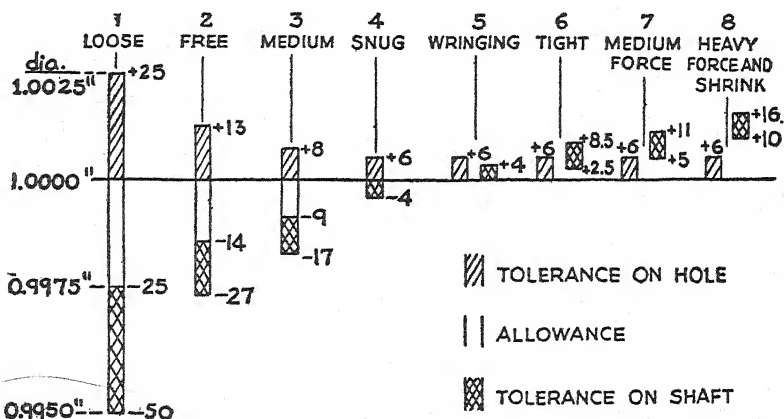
The Eight A.S.A. Fits for Parts of a Nominal Size of 1 In. Referred to the 1-In. Basic Size of Hole.
